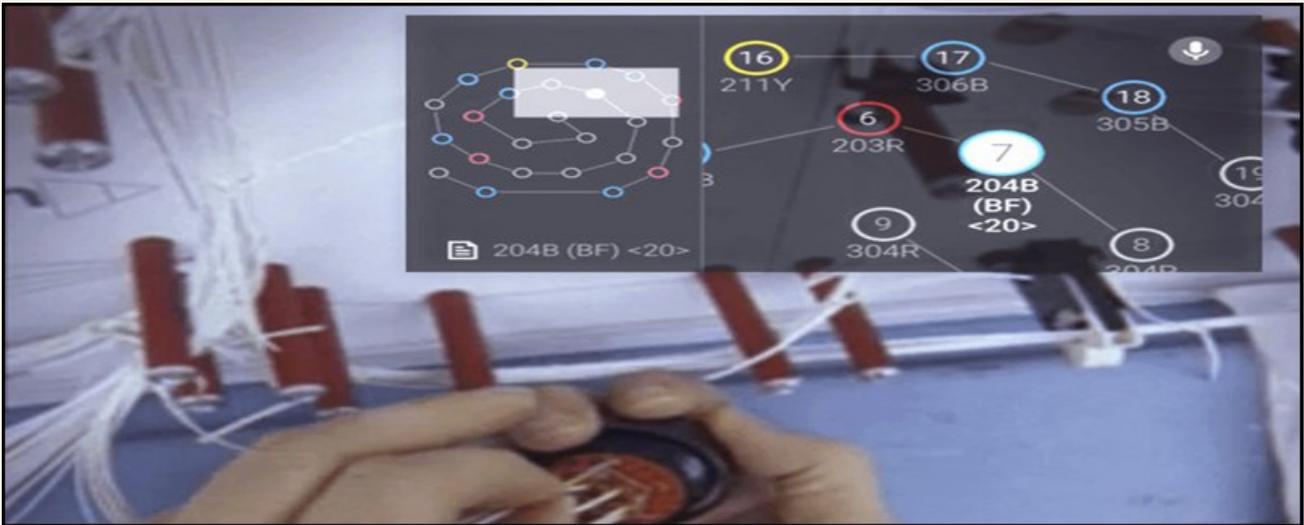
A Boeing technician working on a wire harness using Google Glass and the Skylight App.<sup>33</sup>
